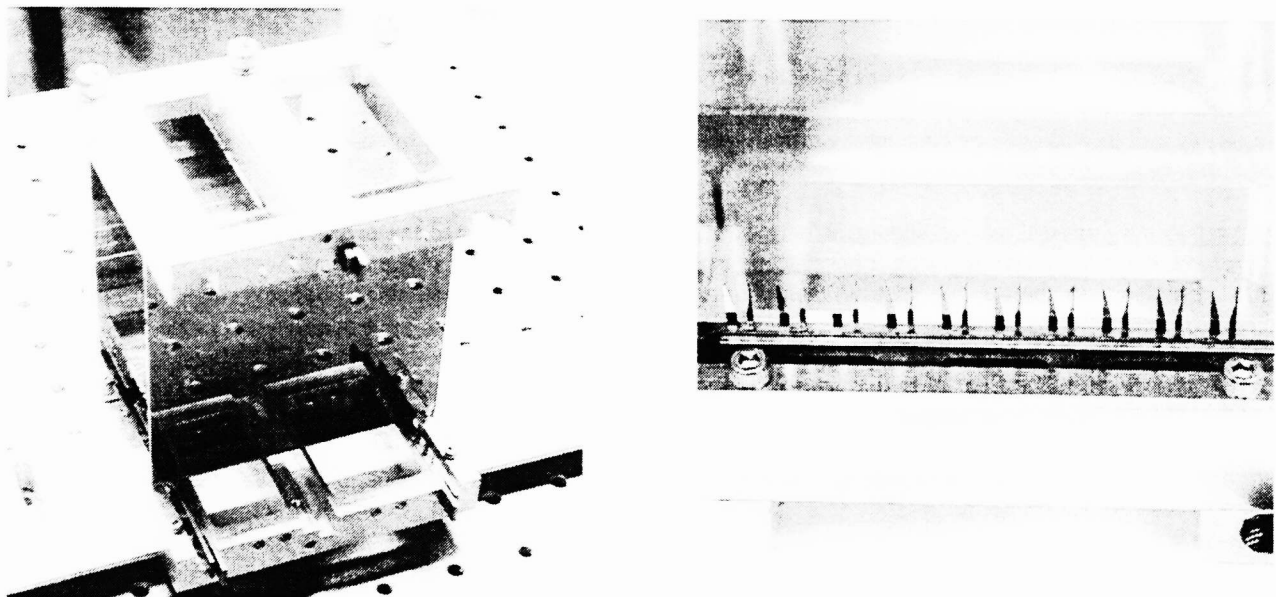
Fixture for testing accuracy of alignment approach using Si microstructures, using flat mirrors. Left: Assembled fixture, with flat mirror installed. Right: reference combs and spring combs in mount. Location of reference comb structure is fixed against a reference plate; spring combs slide as a unit to force reflector against reference surfaces.
